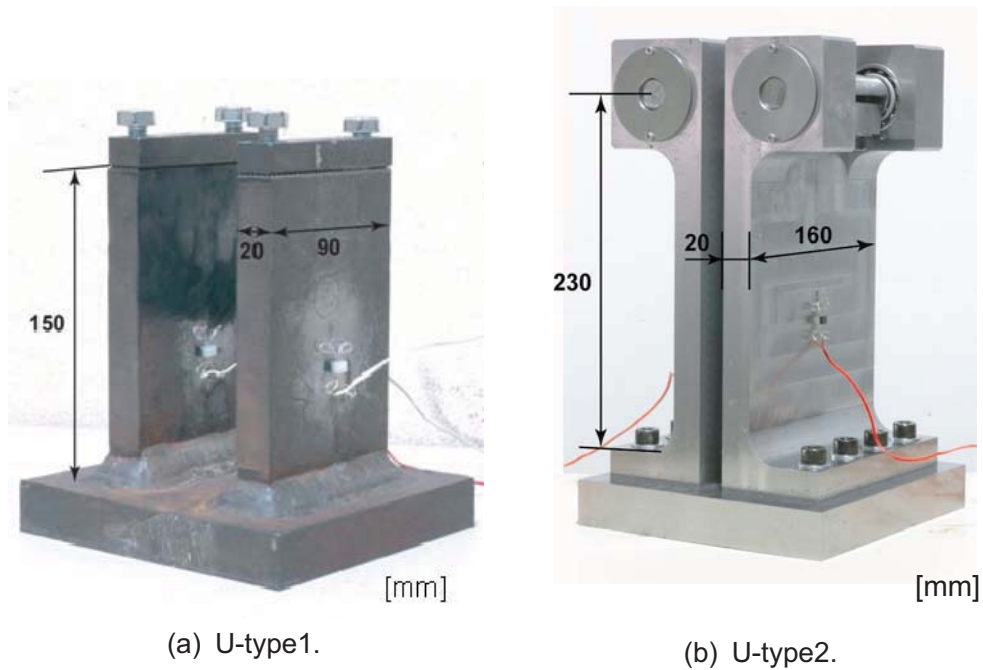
U-type jigs used in U-type hot cracking test.
